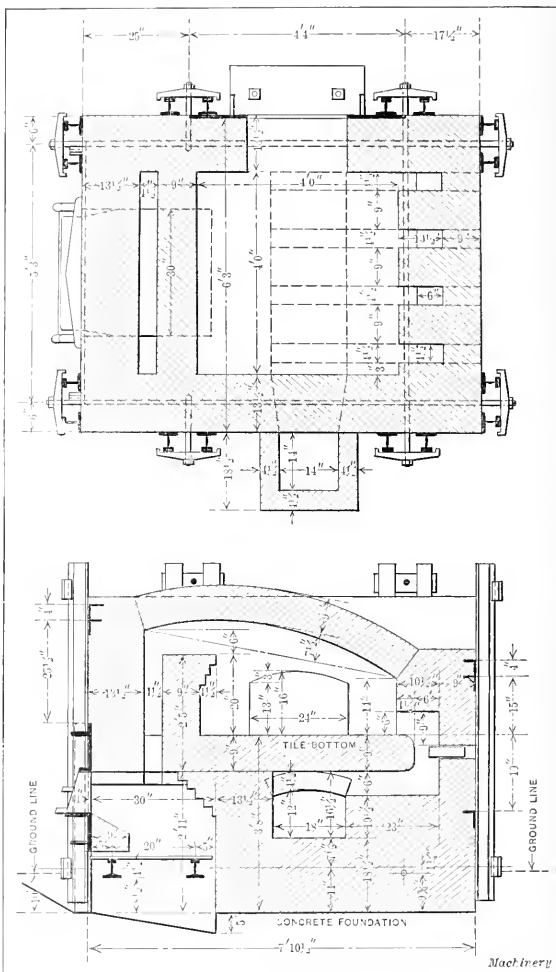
Coal or Coke Furnace for heat-treating Gears
